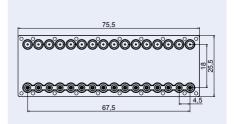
Schematic drawing of the pipetting platform Fluidic 1632
